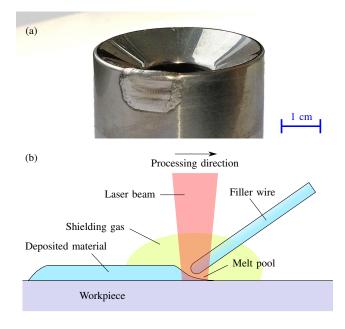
Laser repaired tool before machining (a) and principle of manual laser deposition welding (b).
